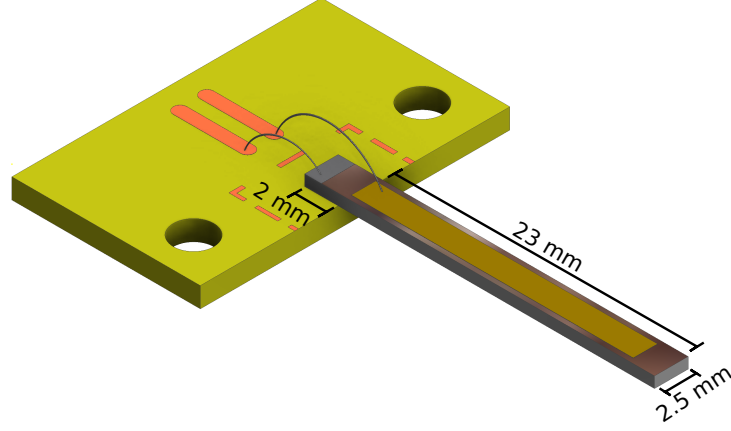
3d model of an exemplary magnetolectric thin-film sensor glued to a PCB made of FR-4. The electrodes are connected with bond-wires to copper pads. The drill holes are for the mounting to a sensor holder.
